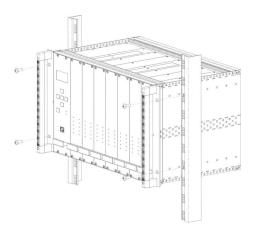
Assembling a DT-900 in a Rack Cabinet.
